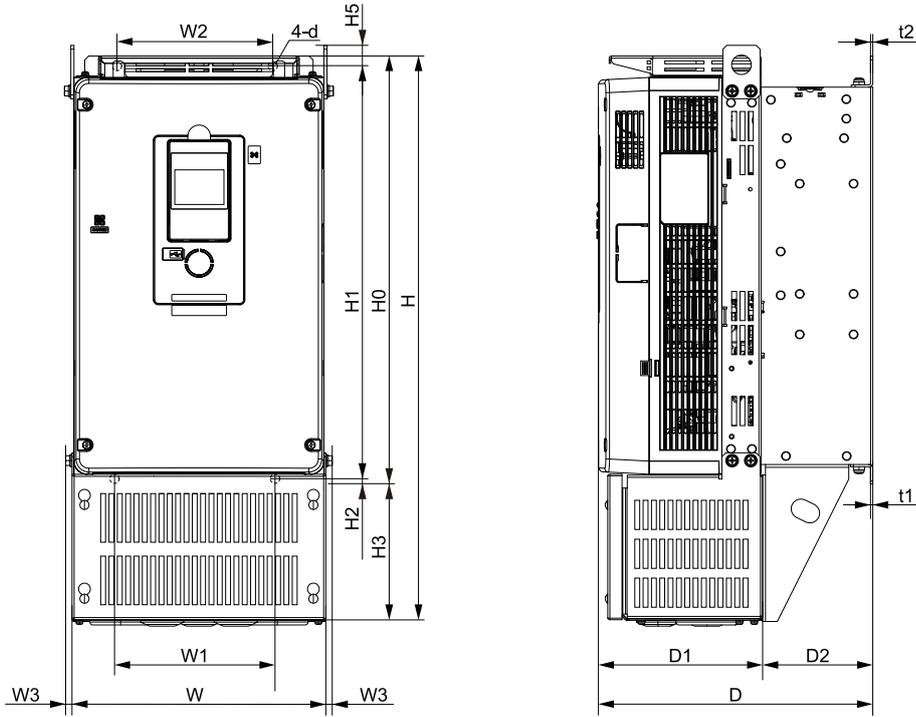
Exterior and Mounting Dimensions Diagram 5
